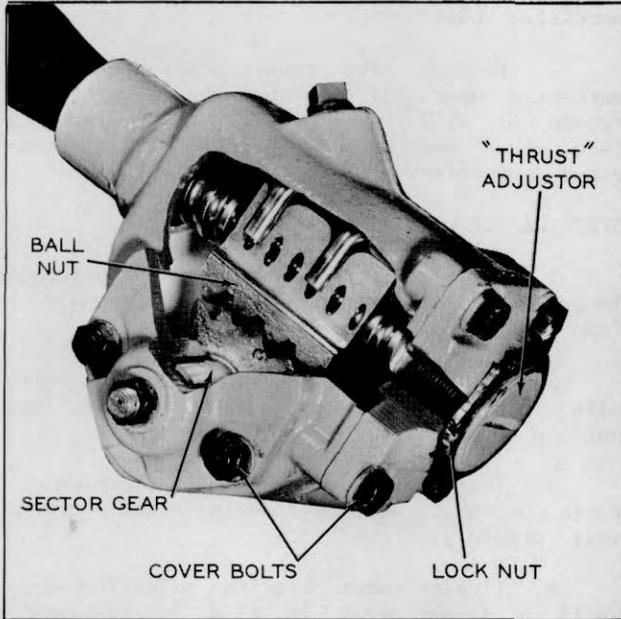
Steering Gear Thrust Adjustment (Worm Bearings)
